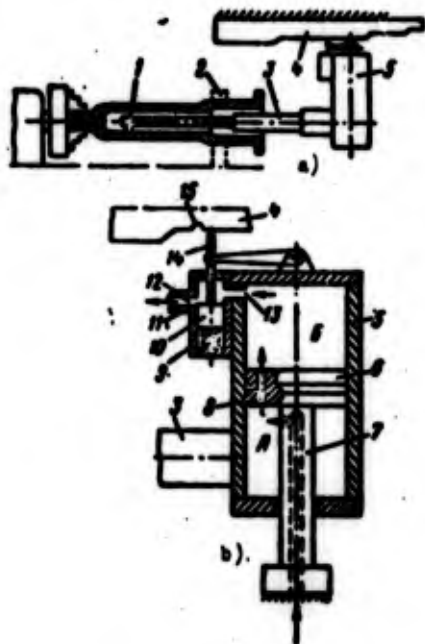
Boring of step holes: 1 - cutter; 2 - recess; 3 - mandrel; 4 - master form; 5 - hydro-support; 6 - piston; 7 - rod; 8 - hole in piston; 9 - housing of valve device; 10 - valve; 11 - oil tap; 12 - valve window; 13 - hole; 14 - thickness gage; 15 - step.
